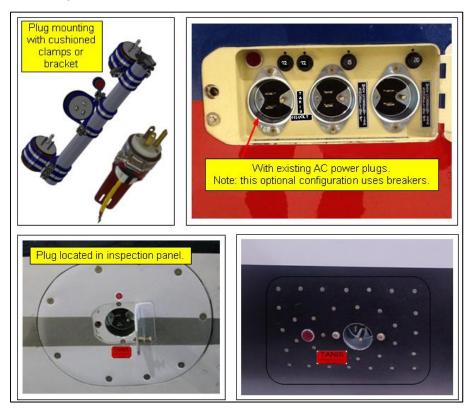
Examples of circular and flush plug mounting options. When installing in panel or cowl, suggest adding connector (TCP2603 and TCS2603), in power lead to aid in inspection panel removal and/or engine access.
